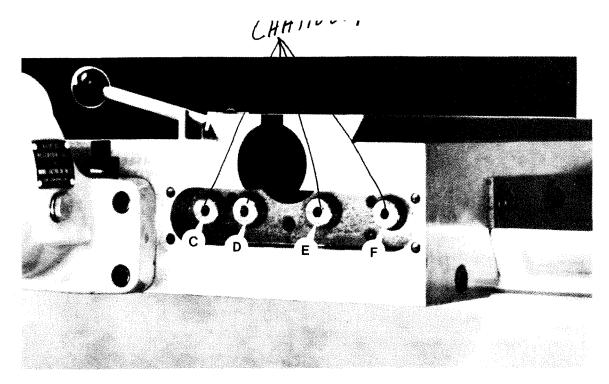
Carriage Oil Feed Tube Assemblies
